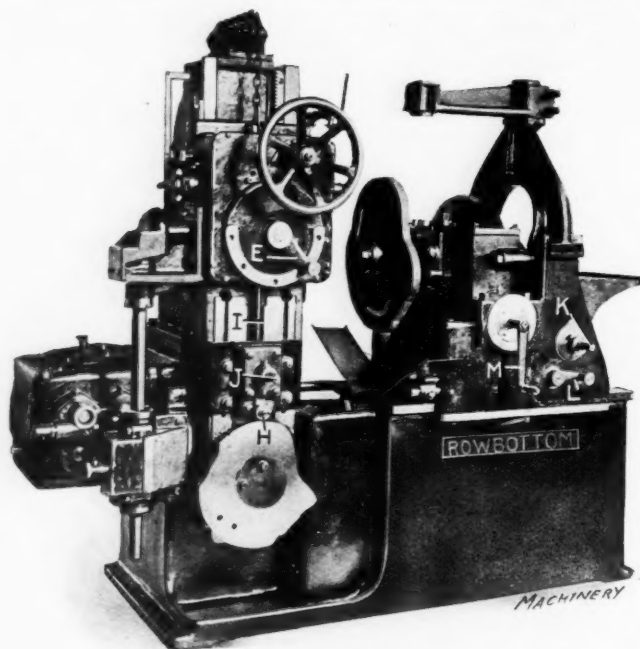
Front View of Rowbottom Universal Cam Milling Machine
